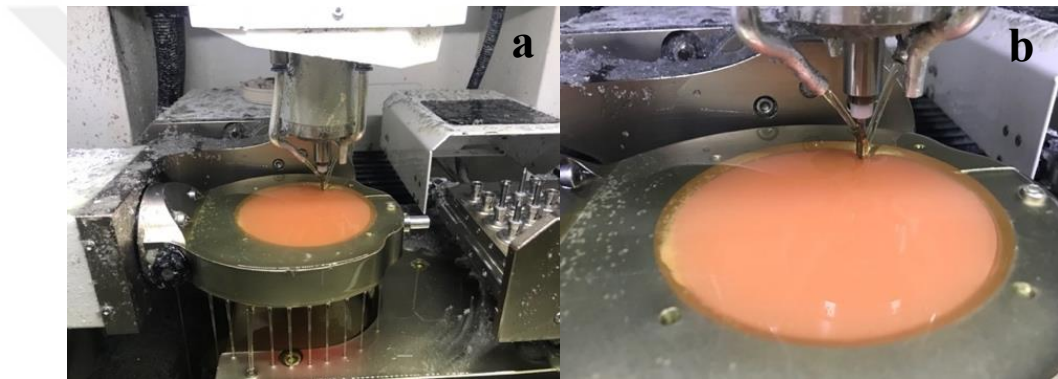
,b. Milled CAD/CAM acrylic blocks
